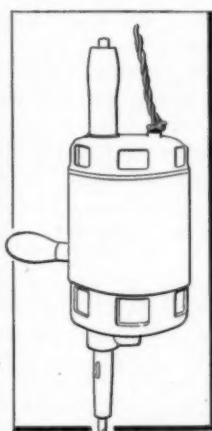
Type A Pioneer valve-grinding tool of the offset spindle type
